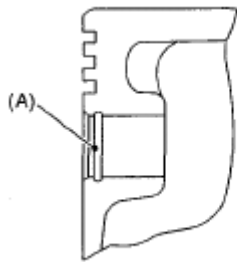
Checking Clearance Between Piston Pin And Hole In Piston
